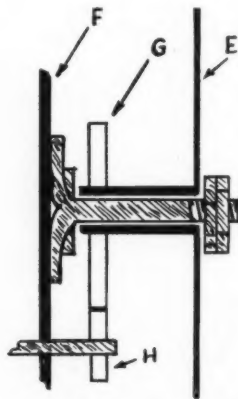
THE ADDITIONAL SHAFT SOLDERED TO THE CLOCK FRAME.
